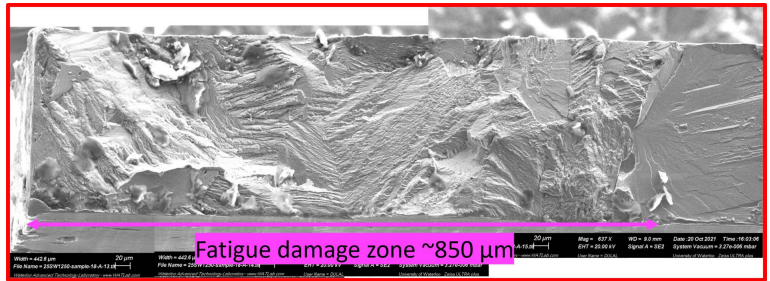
Typical fracture surface for medium to high cycle fatigue life specimens.
